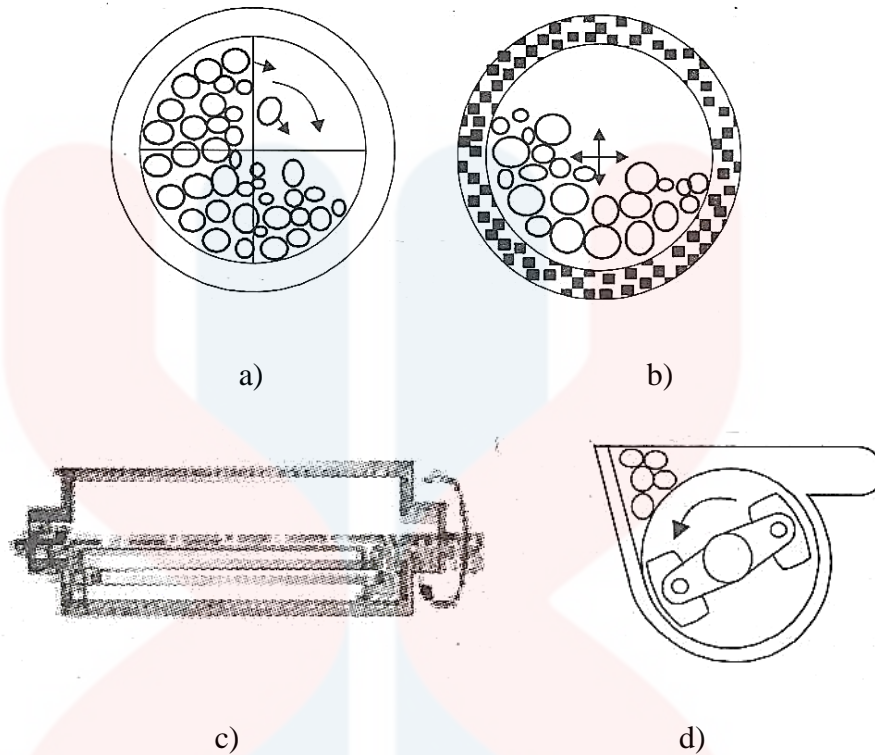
a) Ball mill and b) Vibratory ball mill c) Rodmill and d) Hammer mill (Angelo, 2012)
